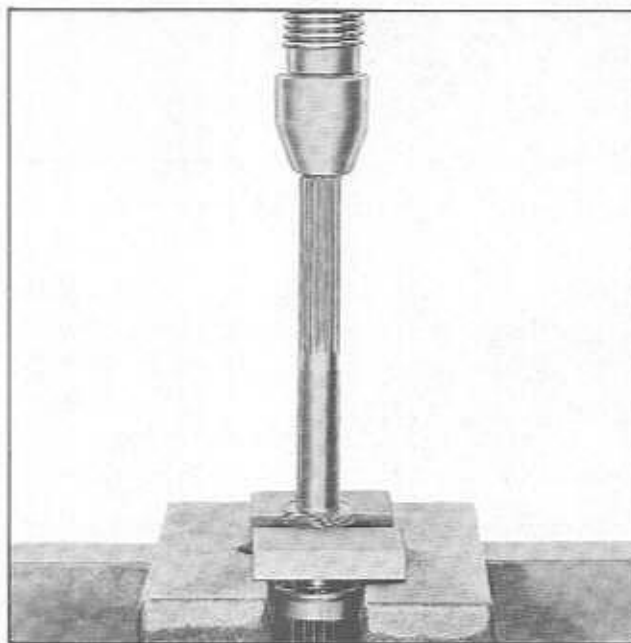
Pressing Speedometer Drive Gear Off Main Shaft
